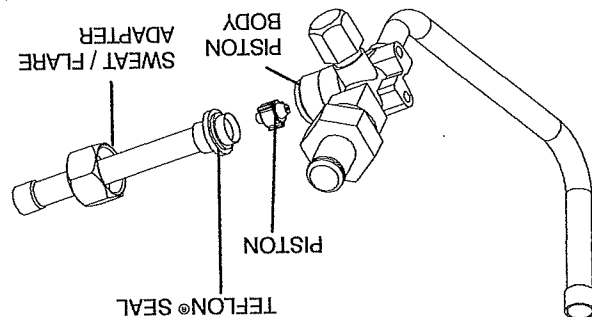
Liquid Service Valve with Sweat Adapter Tube
